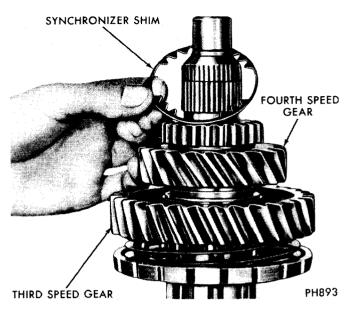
Typical Shim Placement for End Play Adjustment at Front Synchronizer
